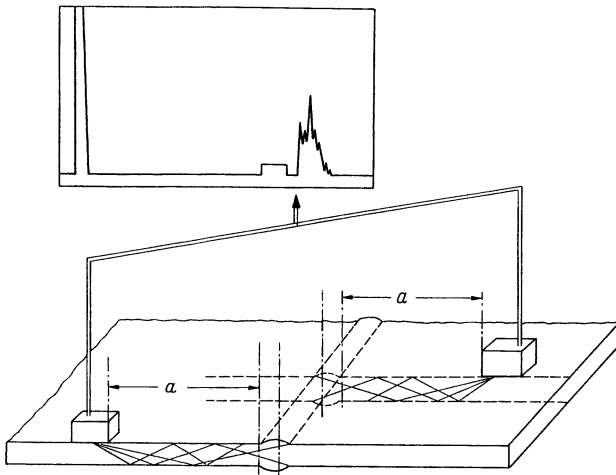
Continuous testing of thin seams produced by automatic welding
